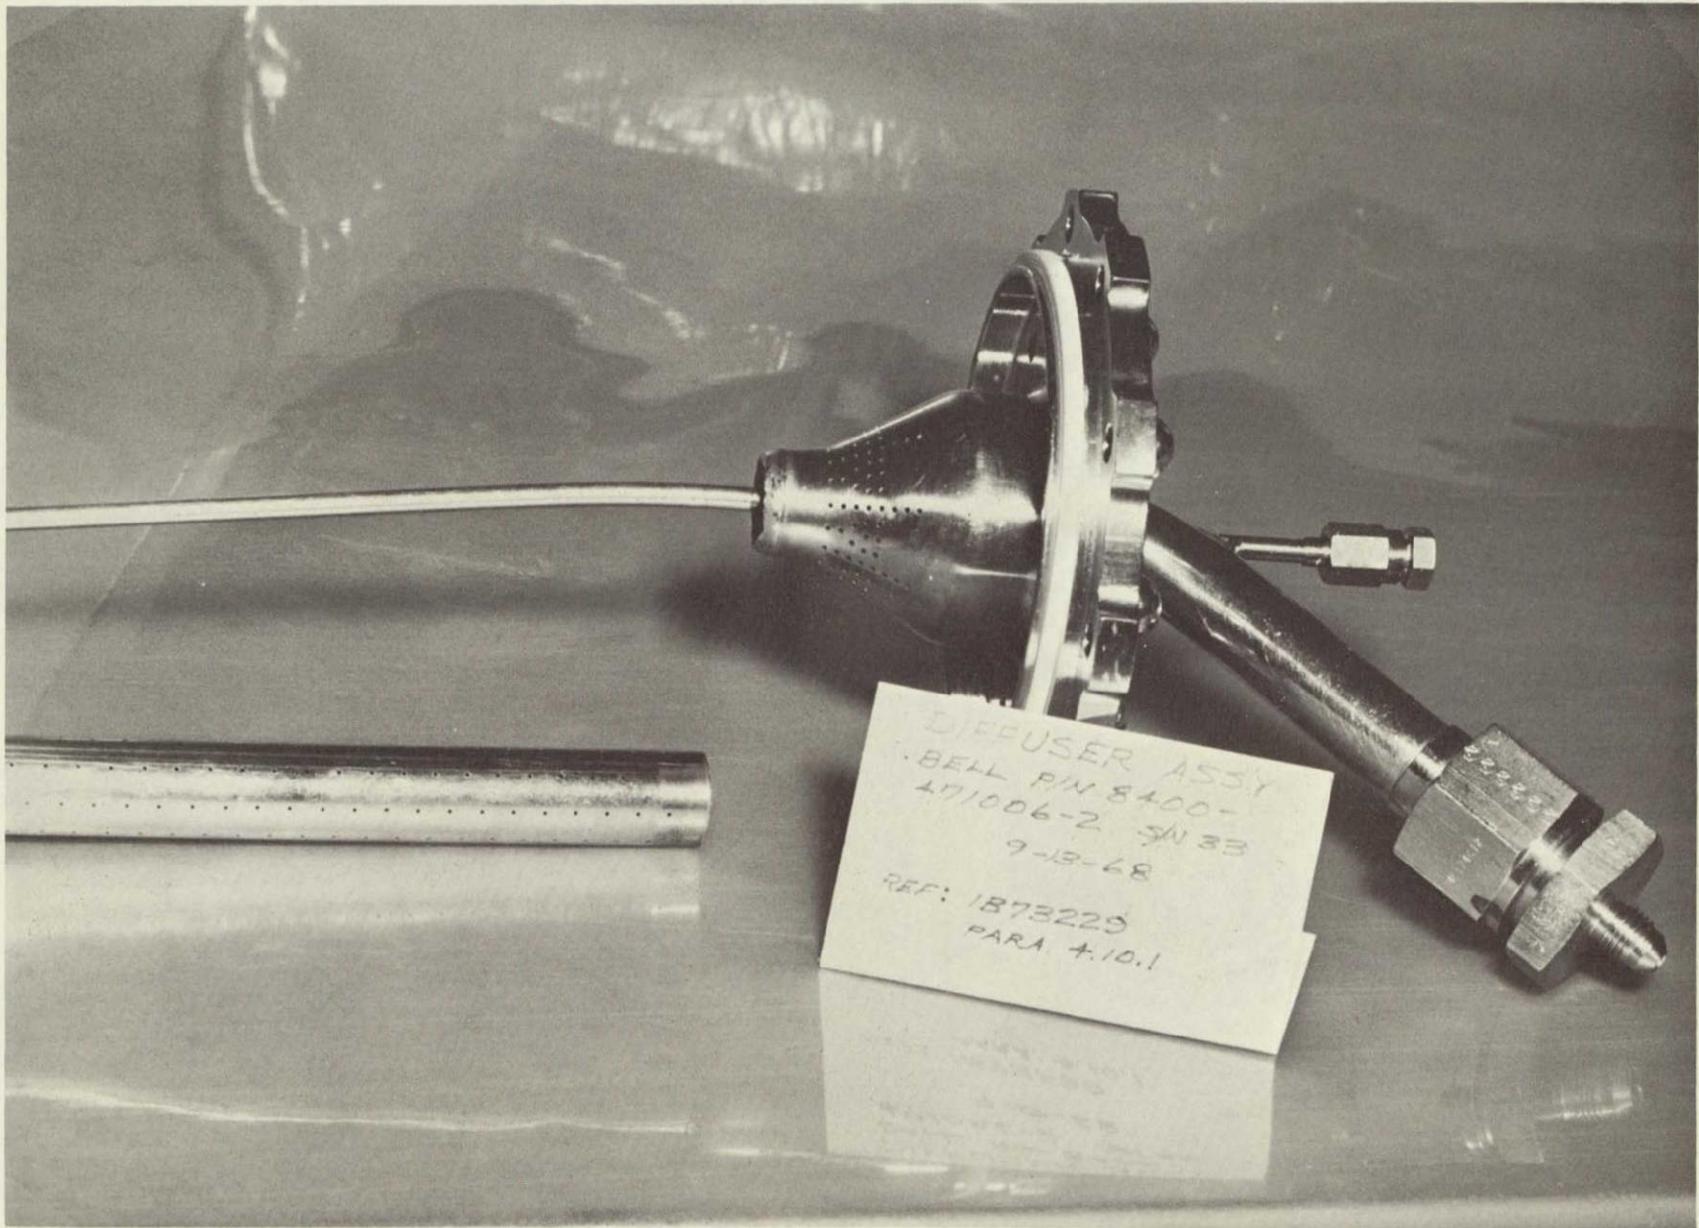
Oxidizer Tank Diffuser Tube (Sheet 2 of 2)
